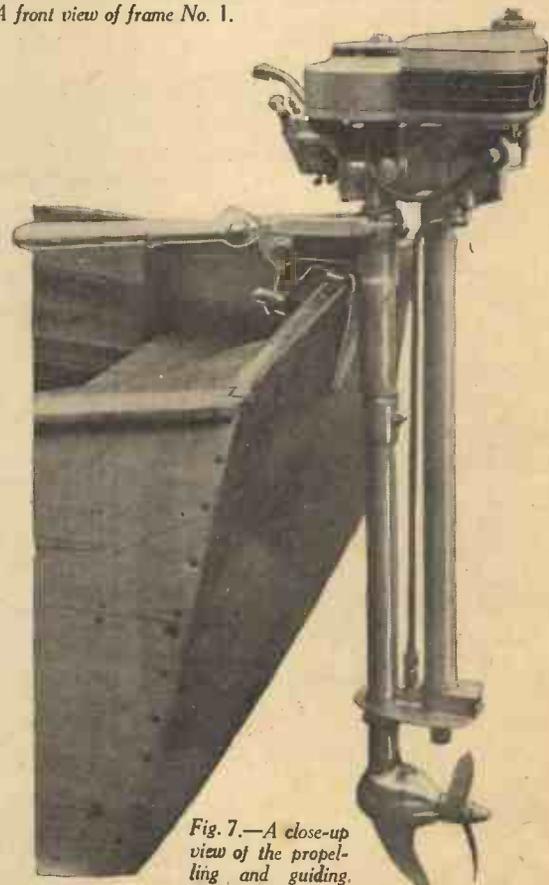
A close-up view of the propelling and guiding mechanism.
